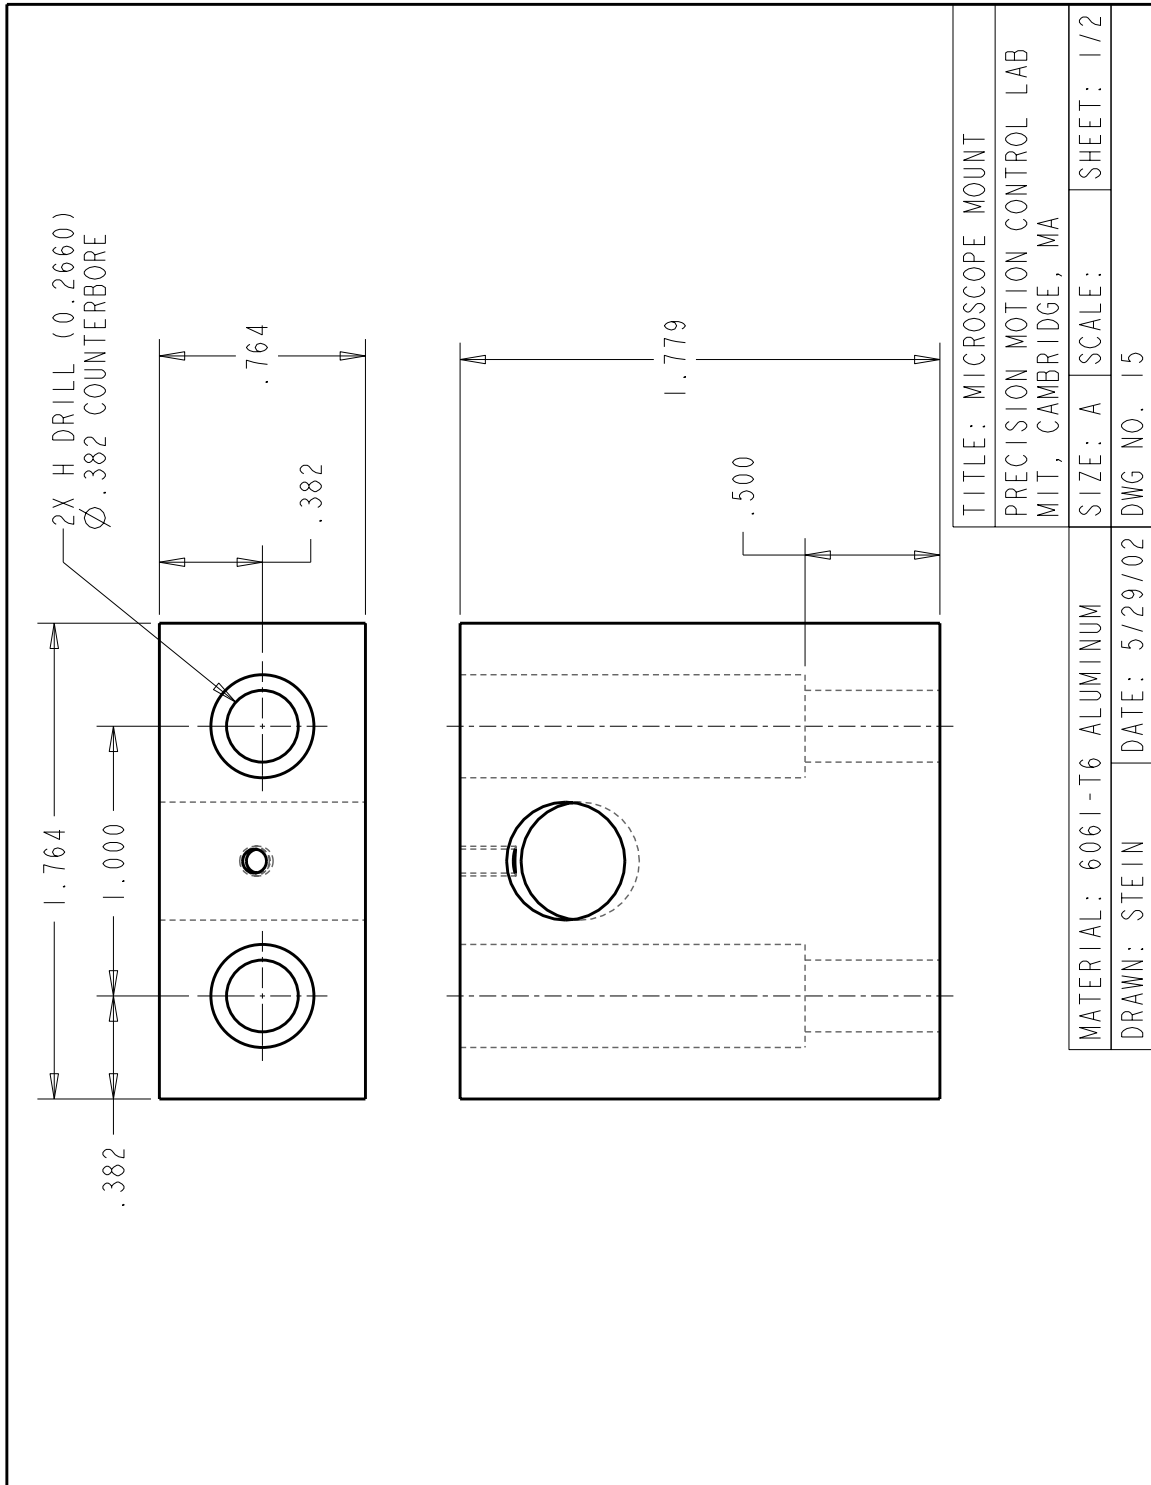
Coarse approach viewer mount mechanical drawing, sheet 1.
